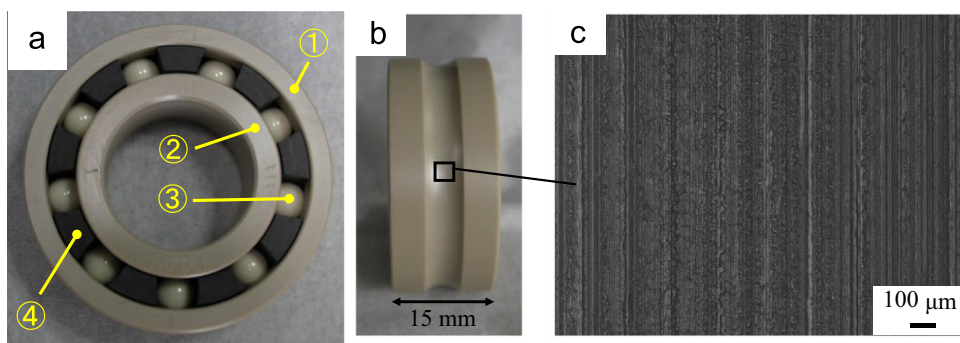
(a) PEEK bearing sample; (1) outer ring, (2) inner ring, (3) alumina ball, (4) retainer, (b) bearing's inner ring prior to test: 1.5 mm width, (c) laser confocal microscope images of the microgrooves on the raceway of the bearing's inner ring by lathe machining.
